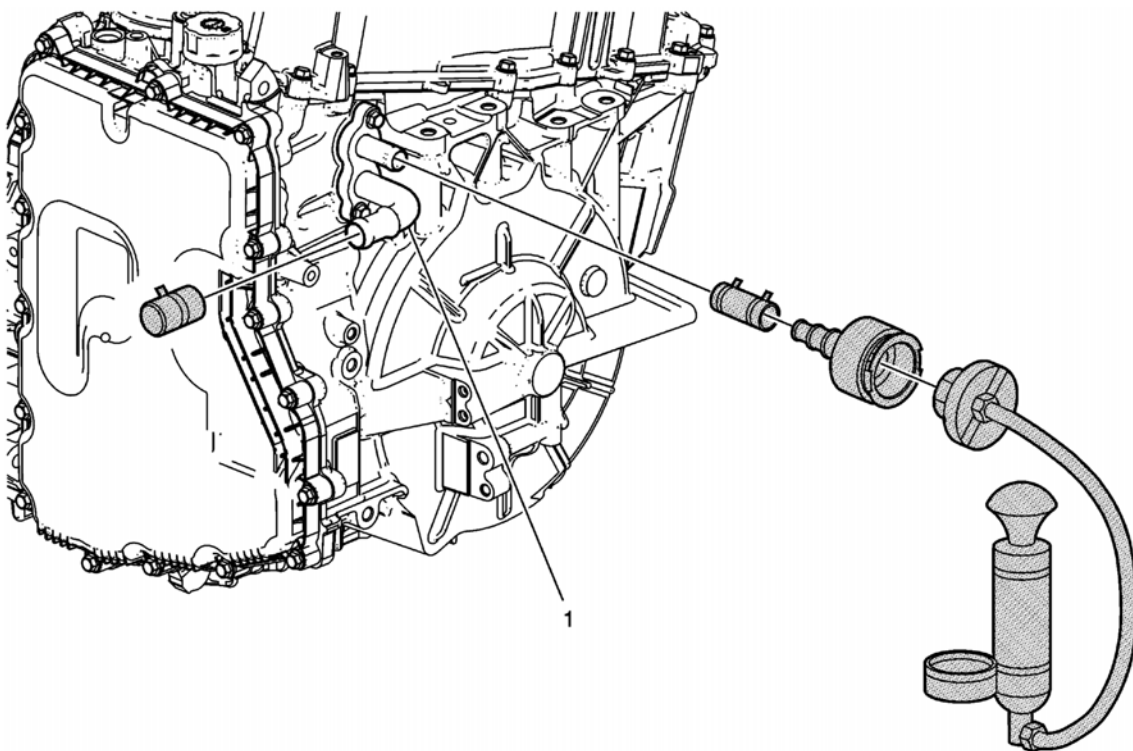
Drive Motor Power Inverter Module Fluid Seal Pressure Test
